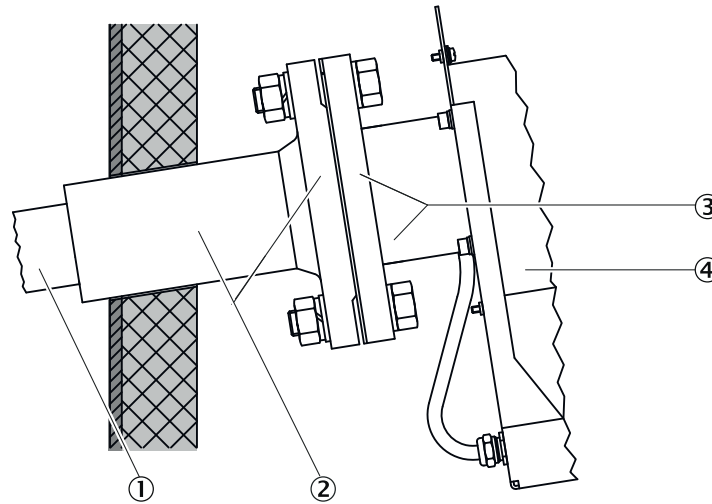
Fitting the gas sampling unit on the welding neck flange
